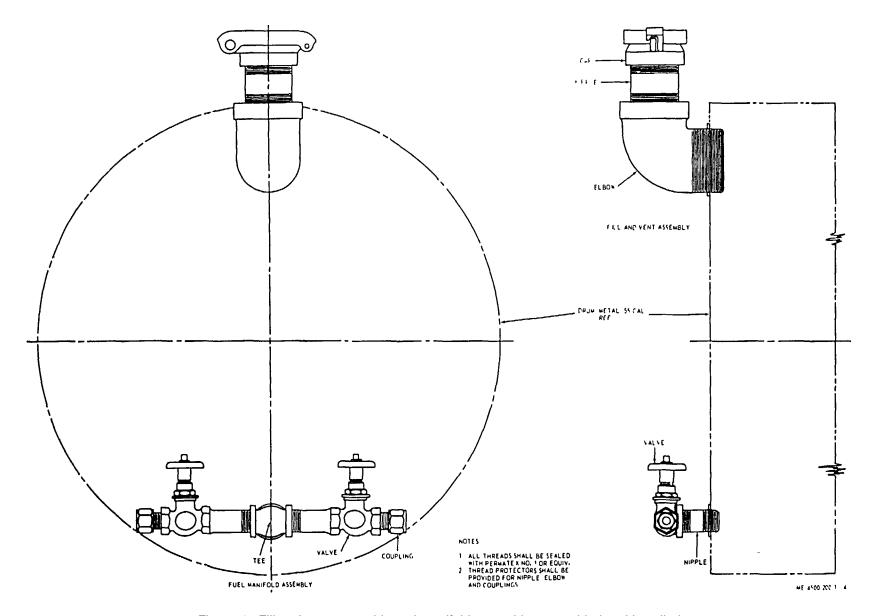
Fill and vent assembly and manifold assembly, assembled and installed
